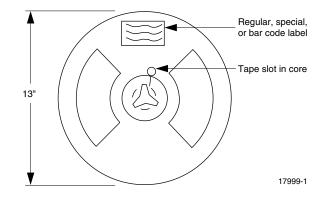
Tape and Reel Shipping Medium (1000 units per reel)
